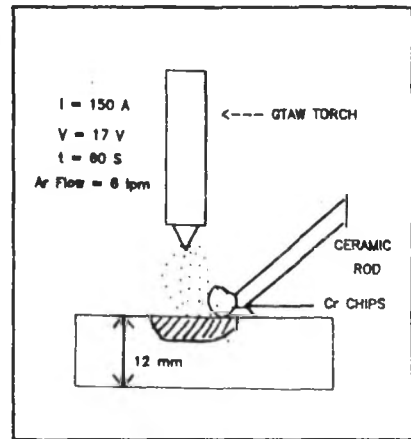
Schematic representation of addition of Cr into the molten weld metal
